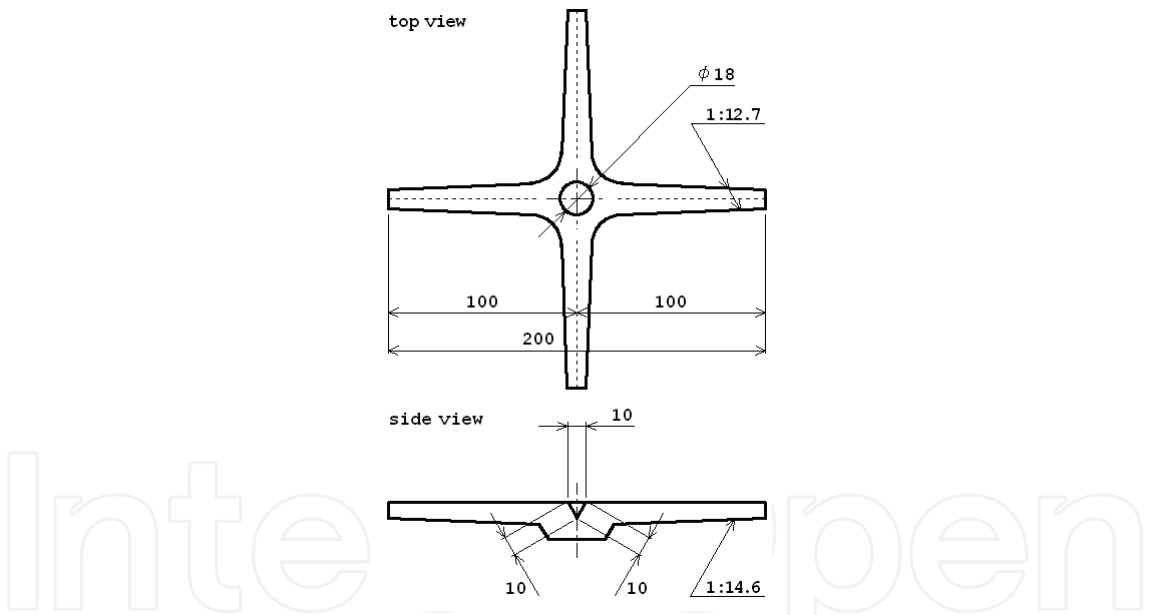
Structure and dimensions (in mm) of the impeller used.
